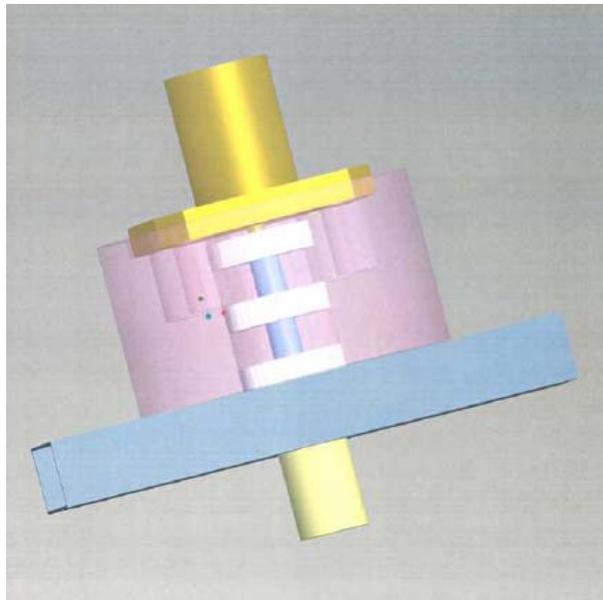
Three Dimensional Drawing of Waveguide Based Gunn Diode Oscillator
